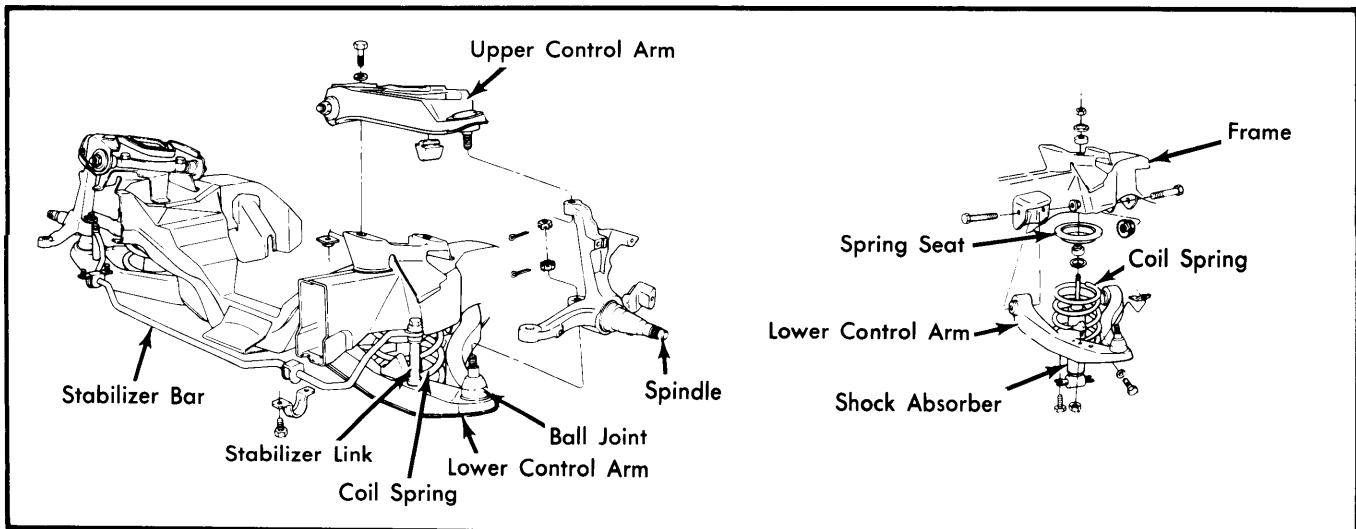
Exploded Views of Ford Enclosed Spring Type Front Suspension
